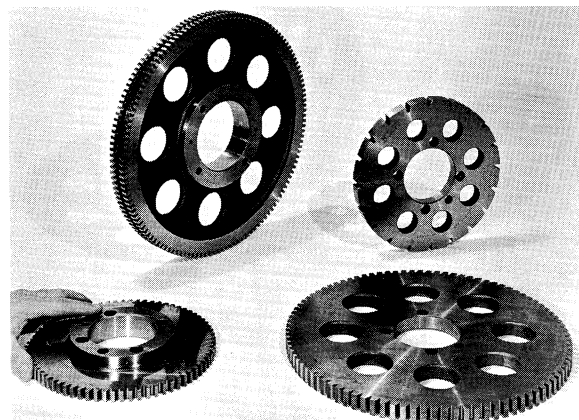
Red Ring super precision index plates of (left to right) split-tooth, single-tooth hub, and single-tooth plain design.
